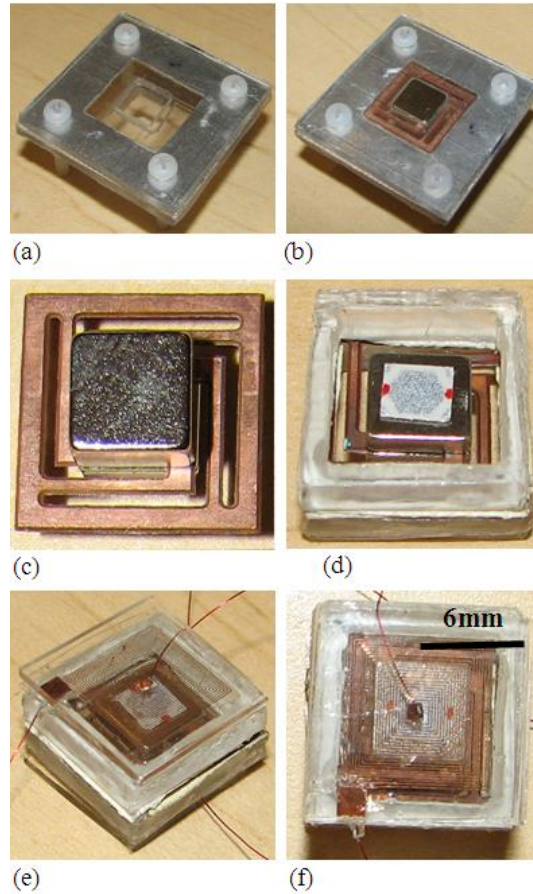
Photographic images of the prototype during various stages of assembly: (a) jig for mounting magnets onto planar spring, (b) magnets and planar spring in the jig, (c) magnets mounted onto the planar spring, (d) planar spring sandwiched between the plastic spacers, (e) glass substrates, containing the micro-coils bonded to the spacers, (f) top view of the assembled EMPG.
